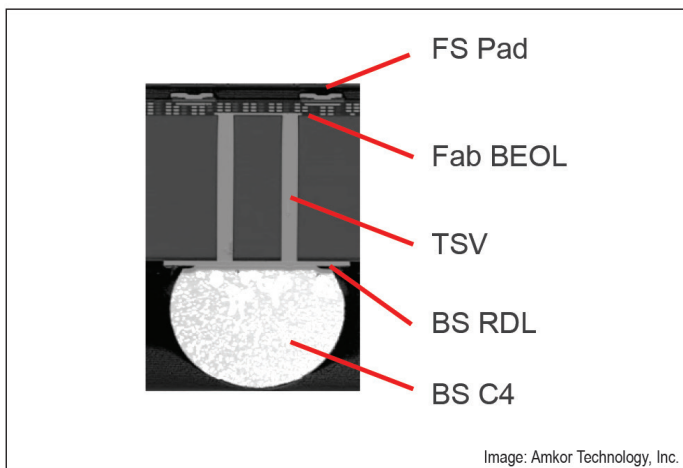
Package cross section from front side (FS) pad to backside (BS) C4.
